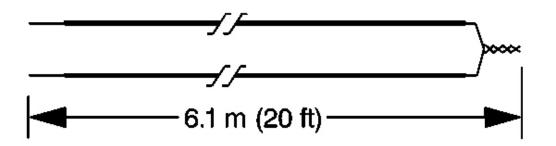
Fabricating 20 Ft. Deployment Harness Courtesy of GENERAL MOTORS CORP.
